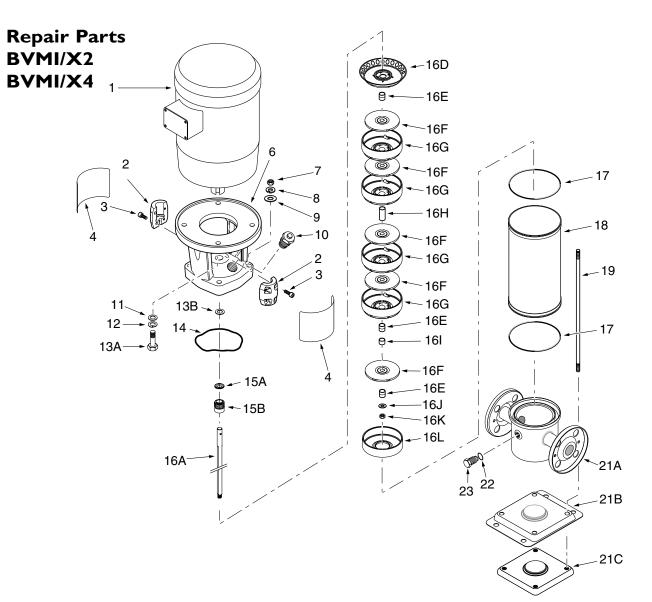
Exploded	View	BVMI/X2	and	BVMI/X4
